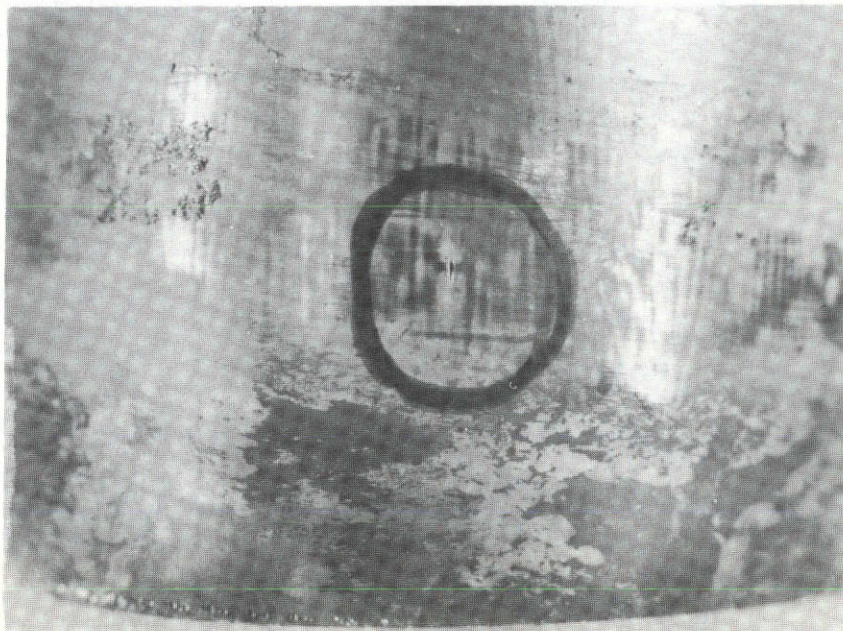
Fracture Surface of Cylinder No. 12 (Heat Treated)
